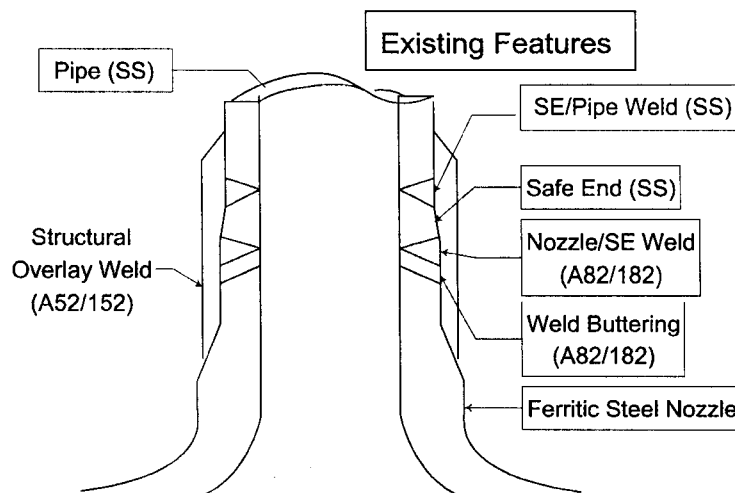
Typical Weld Overlay Repair Configuration
